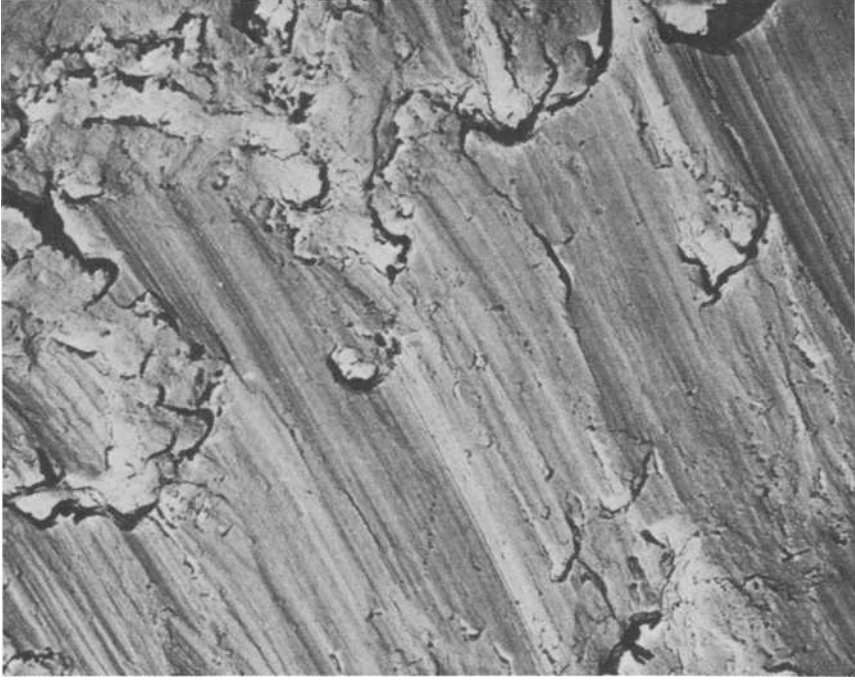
Appearance of slant fatigue fracture surface in a 2024-T3 aluminum alloy [81].
